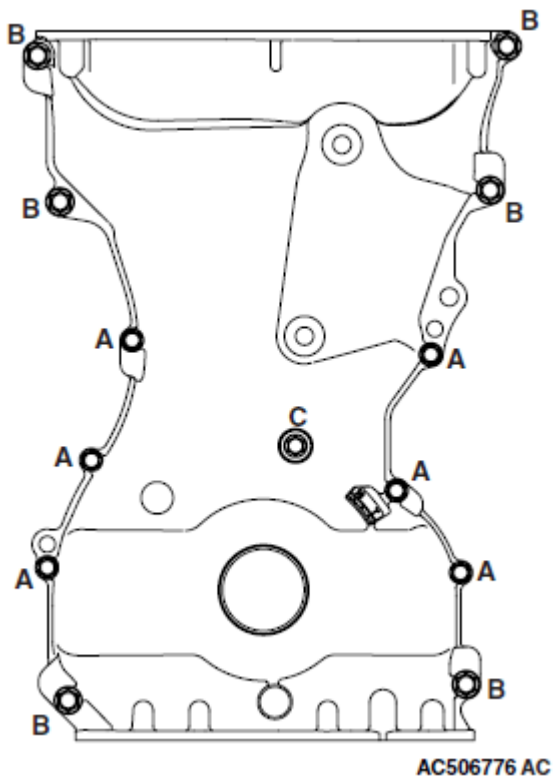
Identifying Timing Chain Case Assembly And Bolts Tightening Sequence
